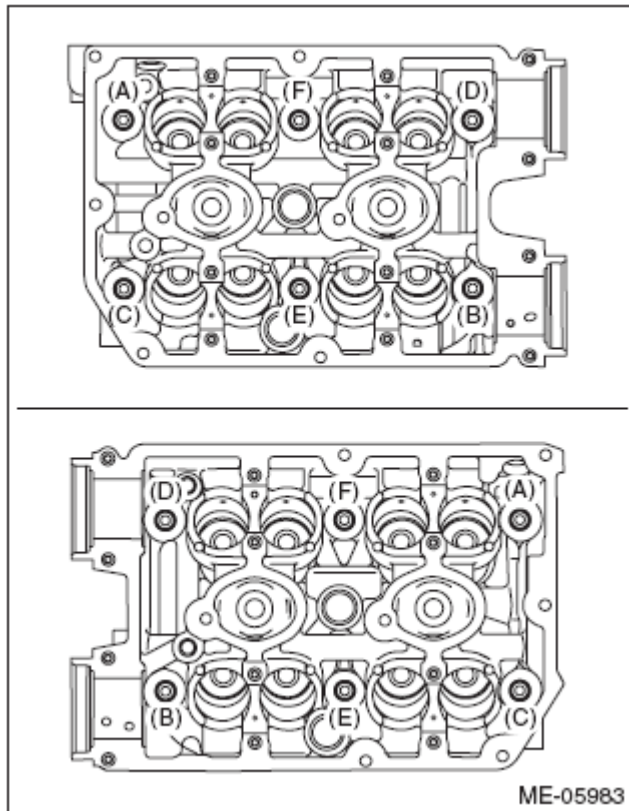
Identifying Removal Sequence Of Cylinder Head Mounting Bolts
